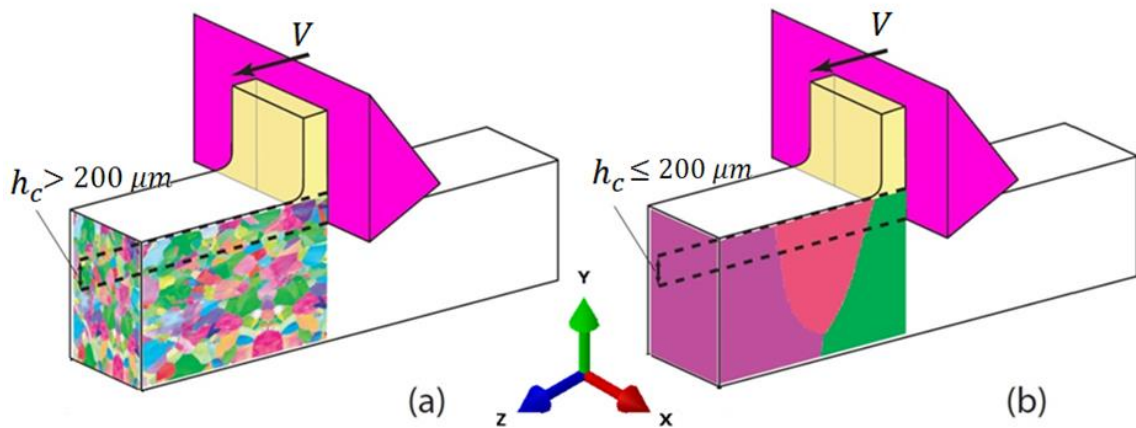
1 Workpiece microstructures in macro-machining (a) and micro-machining (b) after (Kota, 2011)
